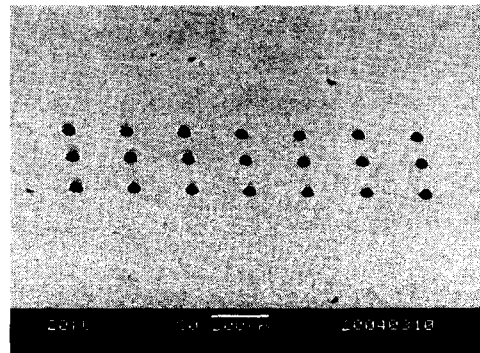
Micro hole array machined using multi electrode by ECM (304 SS, 40 μm diameter)
